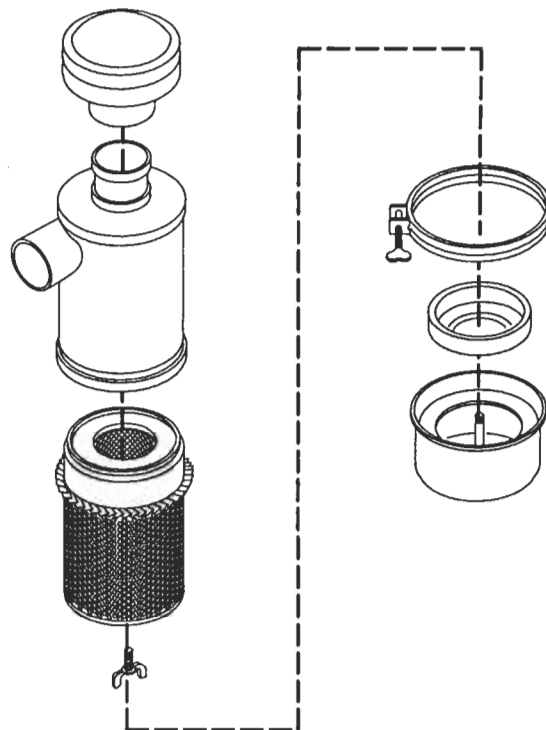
Dry Type Air Cleaner (Heavy Duty)
